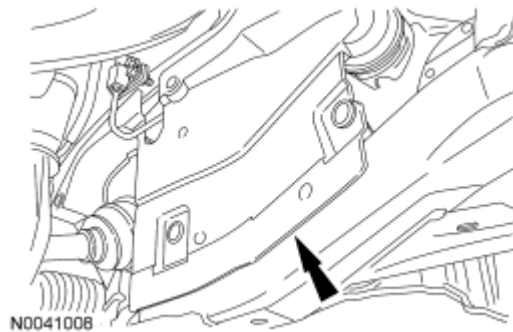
Locating LH Front Structure-To-Subframe Splash Shield
